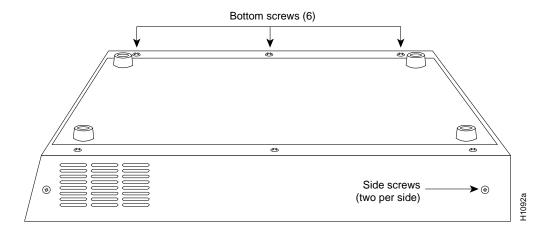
Screw Locations on the C Chassis Exterior—Side View
